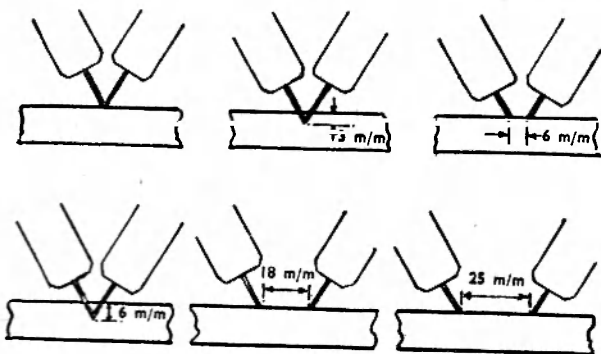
EXPERIMENTAL ARRANGEMENTS OF WELDING GUNS FOR THE TWIN WIRE MIG PROCESS.
